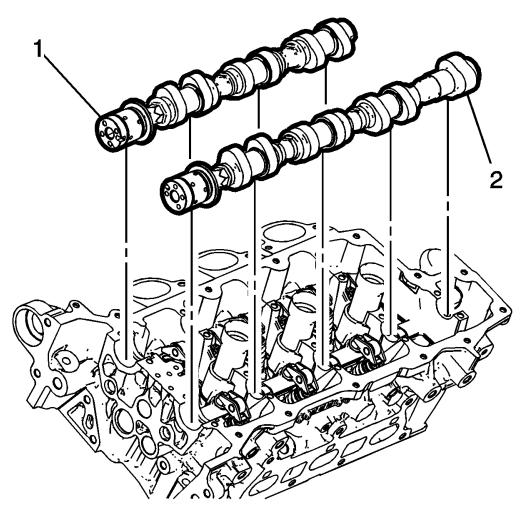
Camshaft Intake And Exhaust Positioning Points Courtesy of GENERAL MOTORS COMPANY
